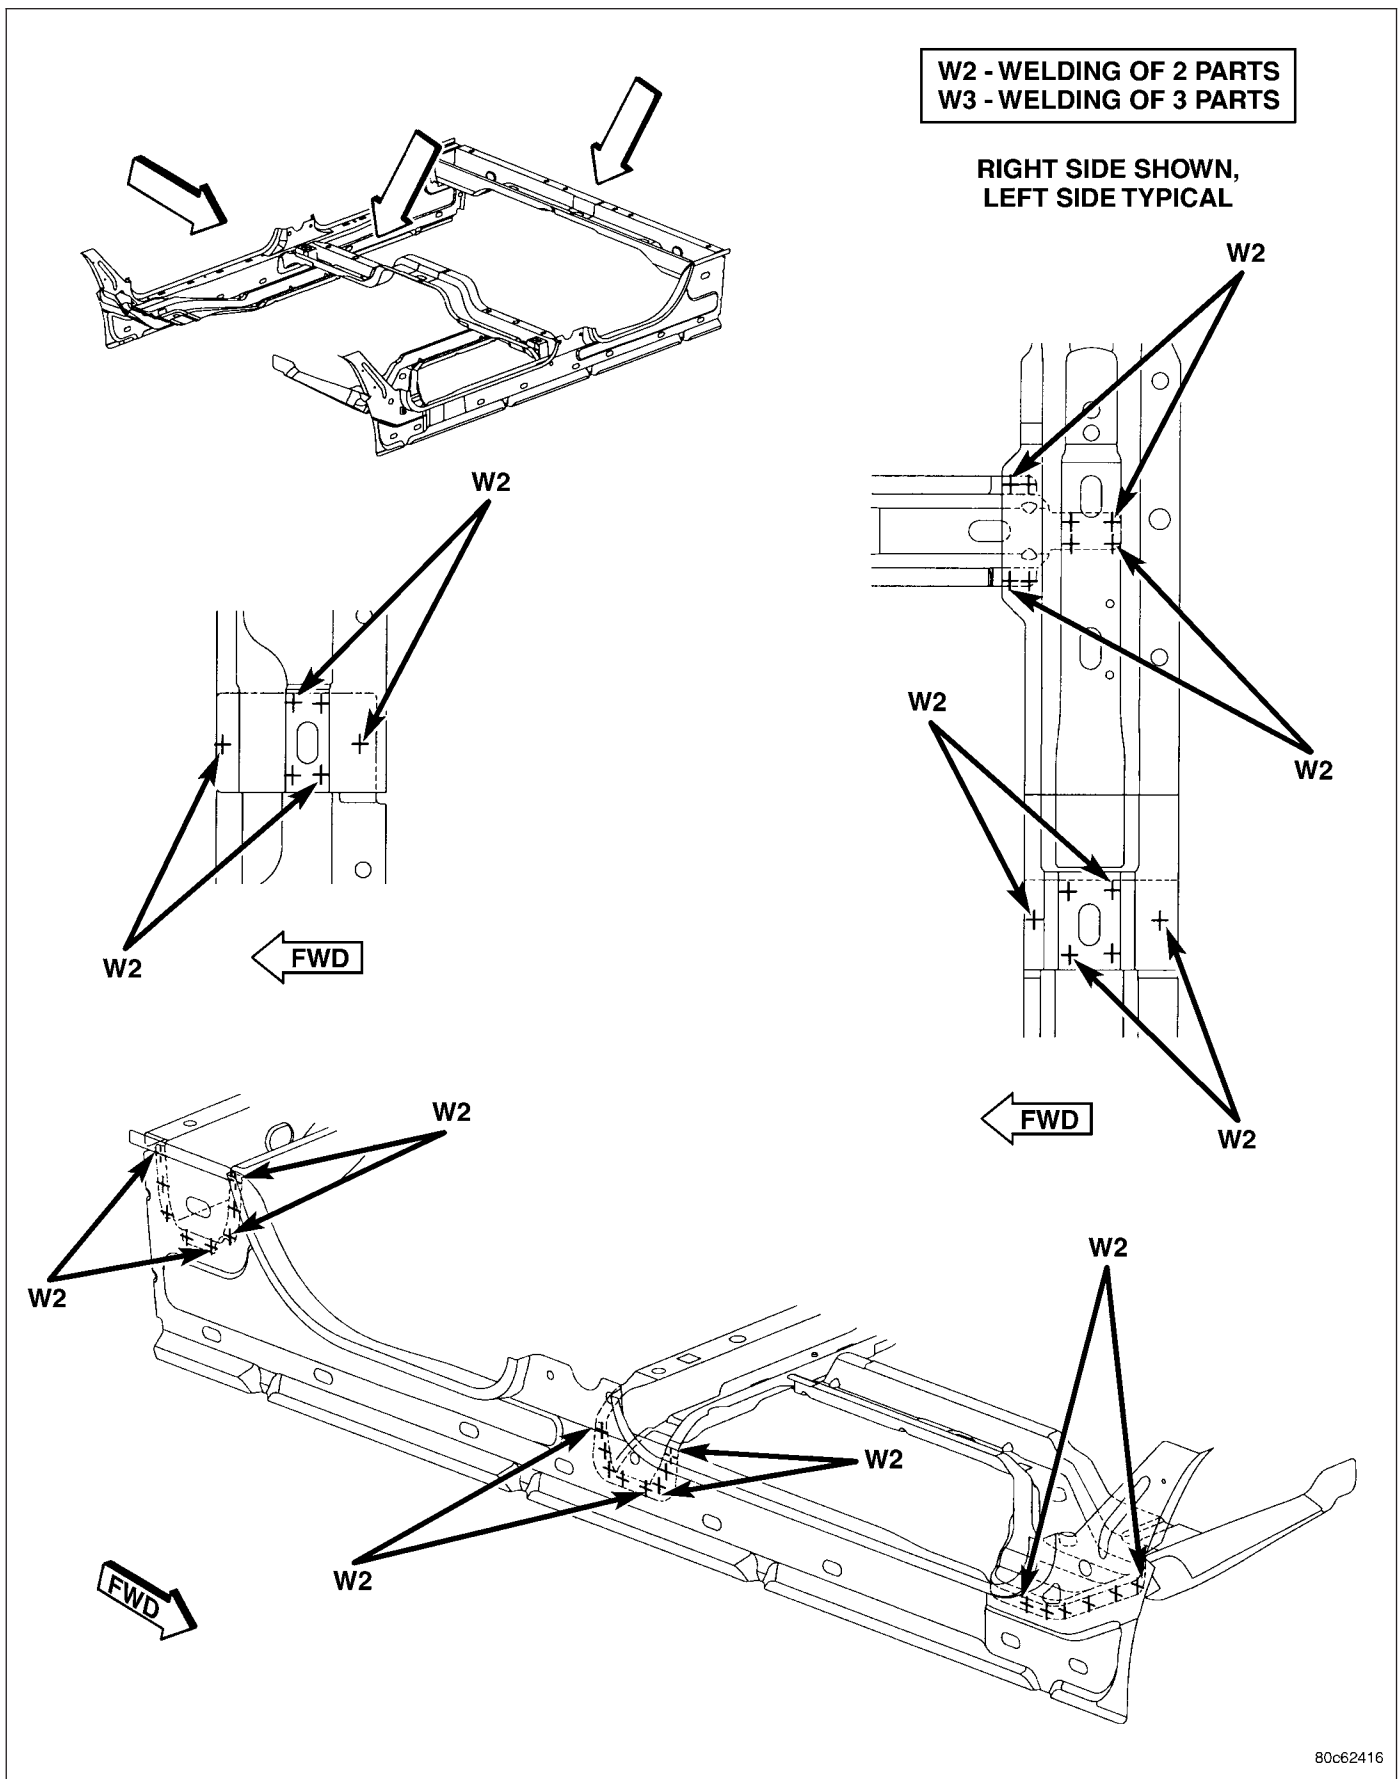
REAR FLOOR CROSSMEMBER - QUAD CAB
